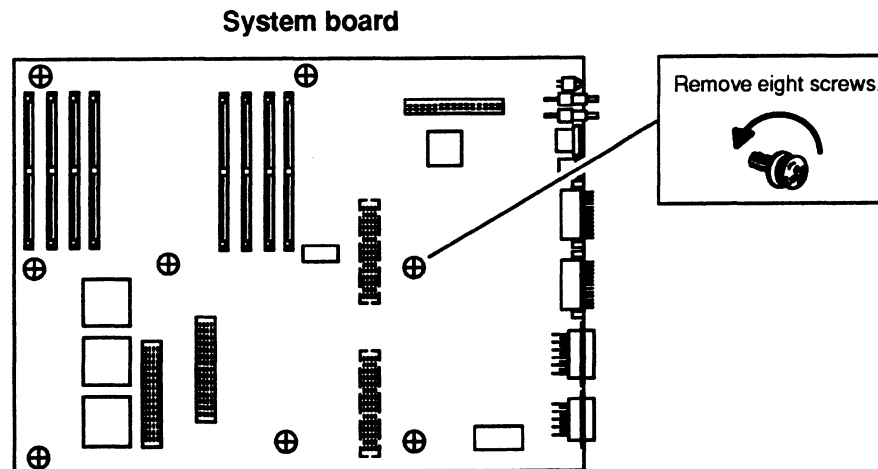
Removing the Screws Securing the System Board to the Computer Unit
